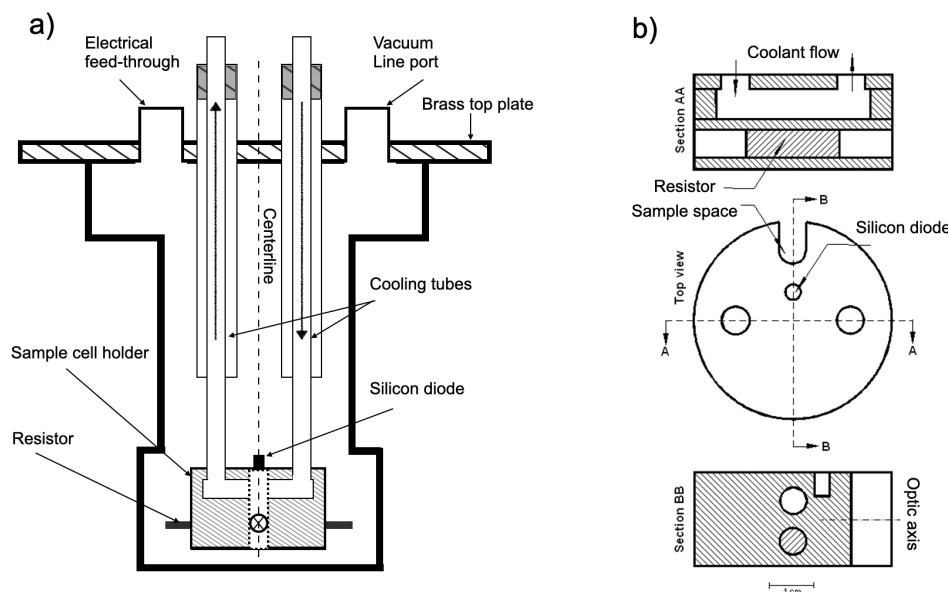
a) Schematic of the custom-built temperature-controlled sample chamber used in the present work with sample cell holder in place. b) Machine drawing of the sample cell holder shown in a).
